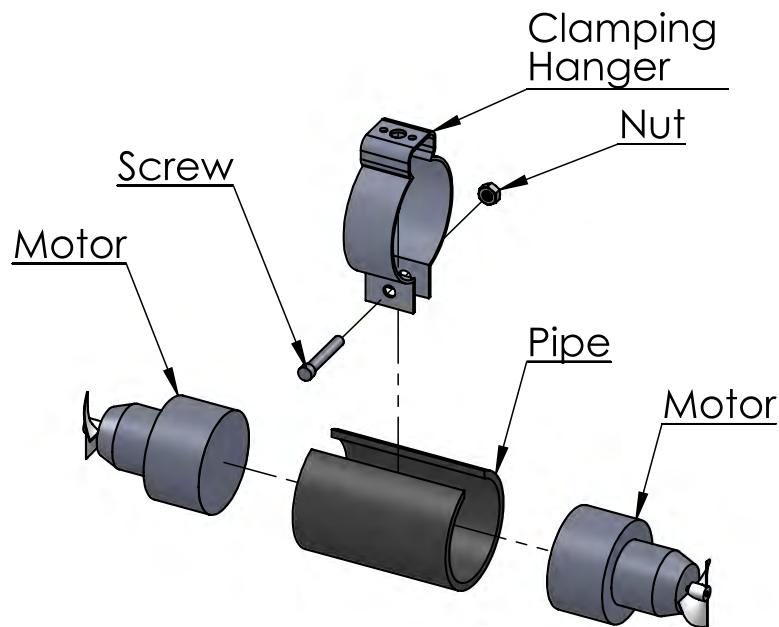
Exploded view of thruster pod assembly. The thruster pod consists of two bilge pump motors fit inside of a PVC pipe that has a slot removed. A clamping conduit hanger fits around the pipe. The hanger is then mounted to the raft frame.
